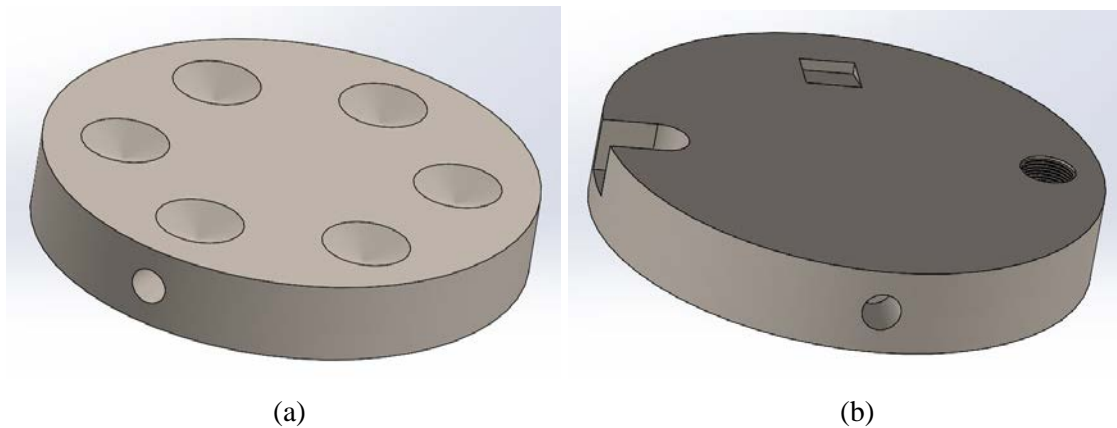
Sample holder base bottom and top view respectively. Figure (a) Bottom view, (b) Top view
